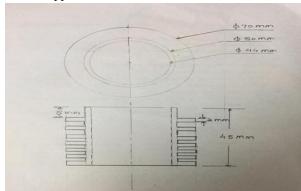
Geometrical dimensions of cylindrical block having circular fins with holes.
